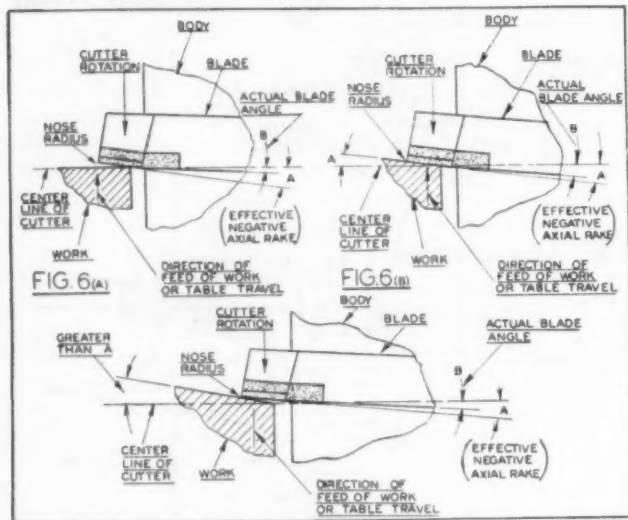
CONDITIONS ENCOUNTERED WHEN CUTTING EDGE ENTERS CUT
